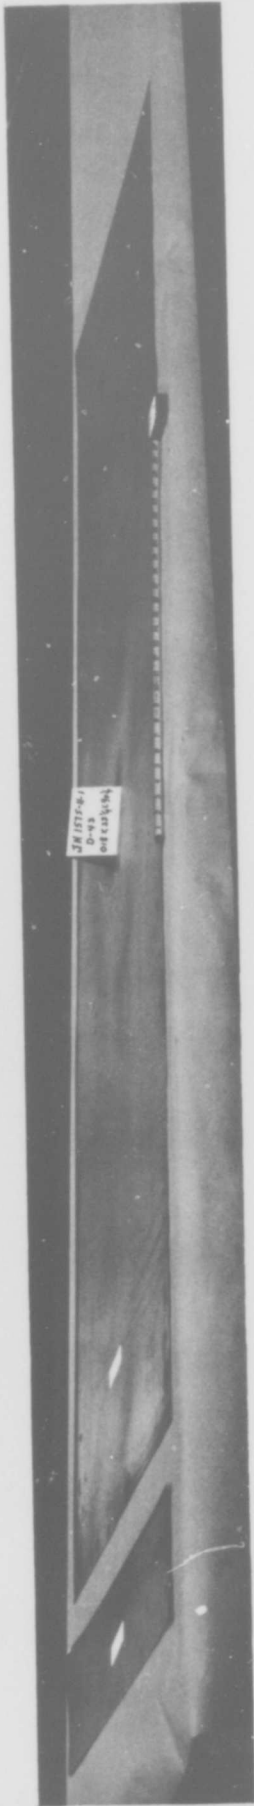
B. D-43 Sheet 0.018" Gage After Shearing
